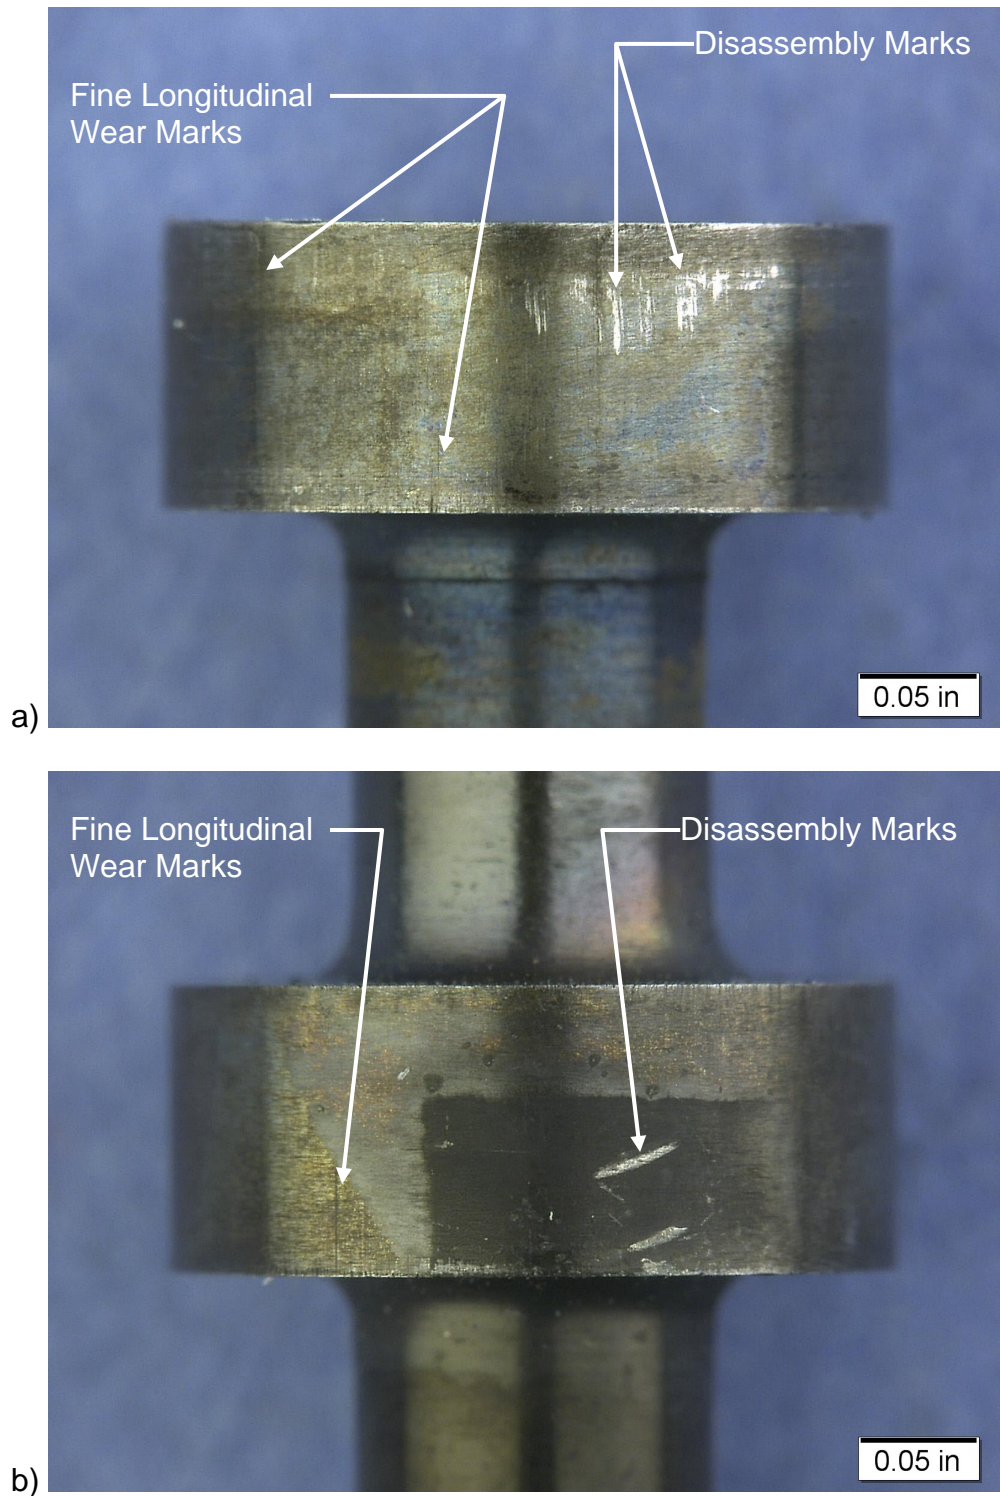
Micrographs of the piston from the Number 2 engine pilot valve assembly; a) right piston valve and b) left piston valve (see figure 10).
